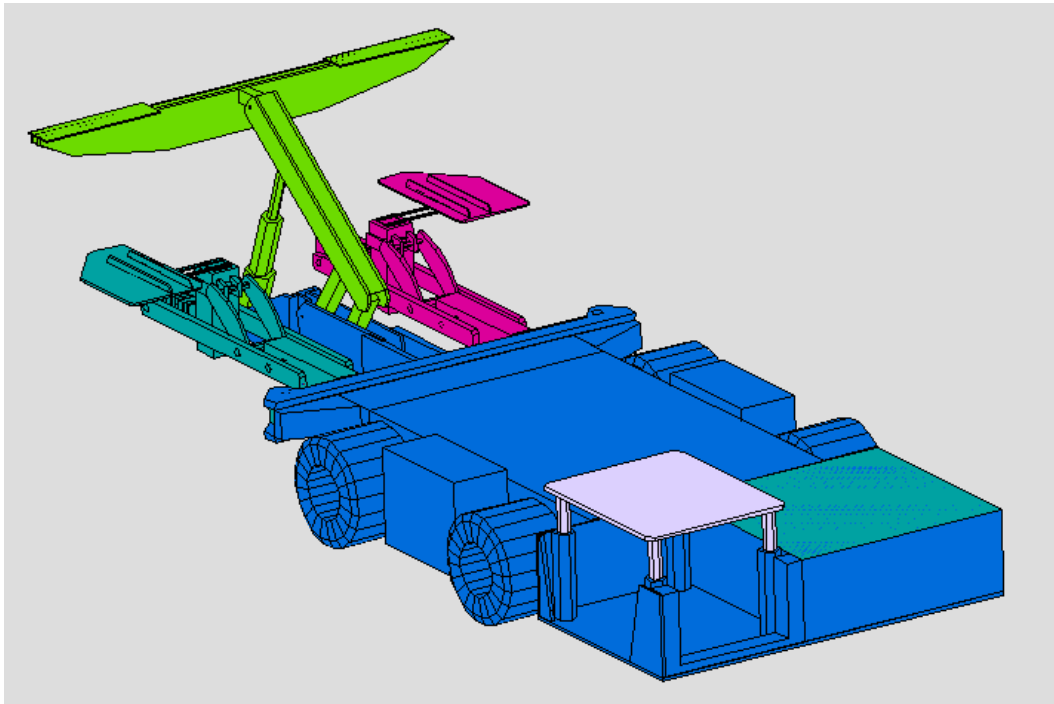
AutoCAD drawing of a Roof Ranger II Roof Bolting Machine
